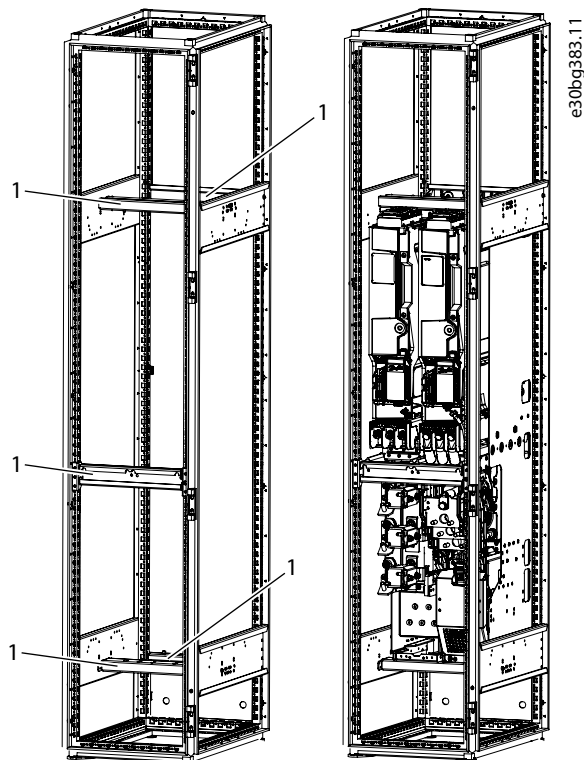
The Mounting Brackets and the Installation of System Modules with the Integration Unit into the Cabinet
